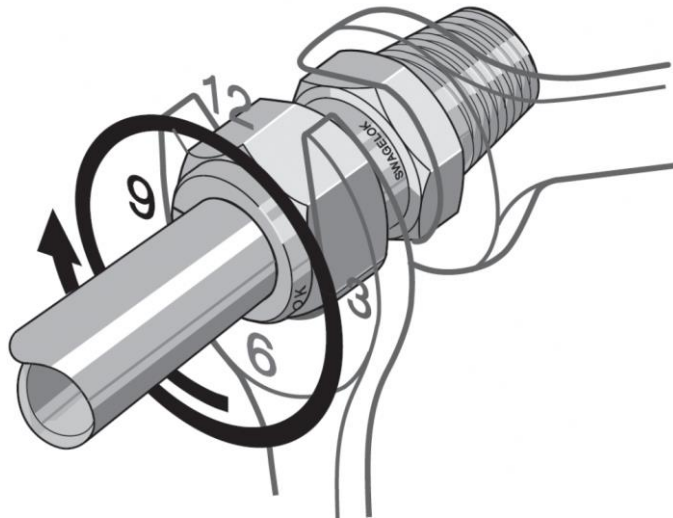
Tightening the Tube Nut to Swage the Stainless Steel Ferrules
